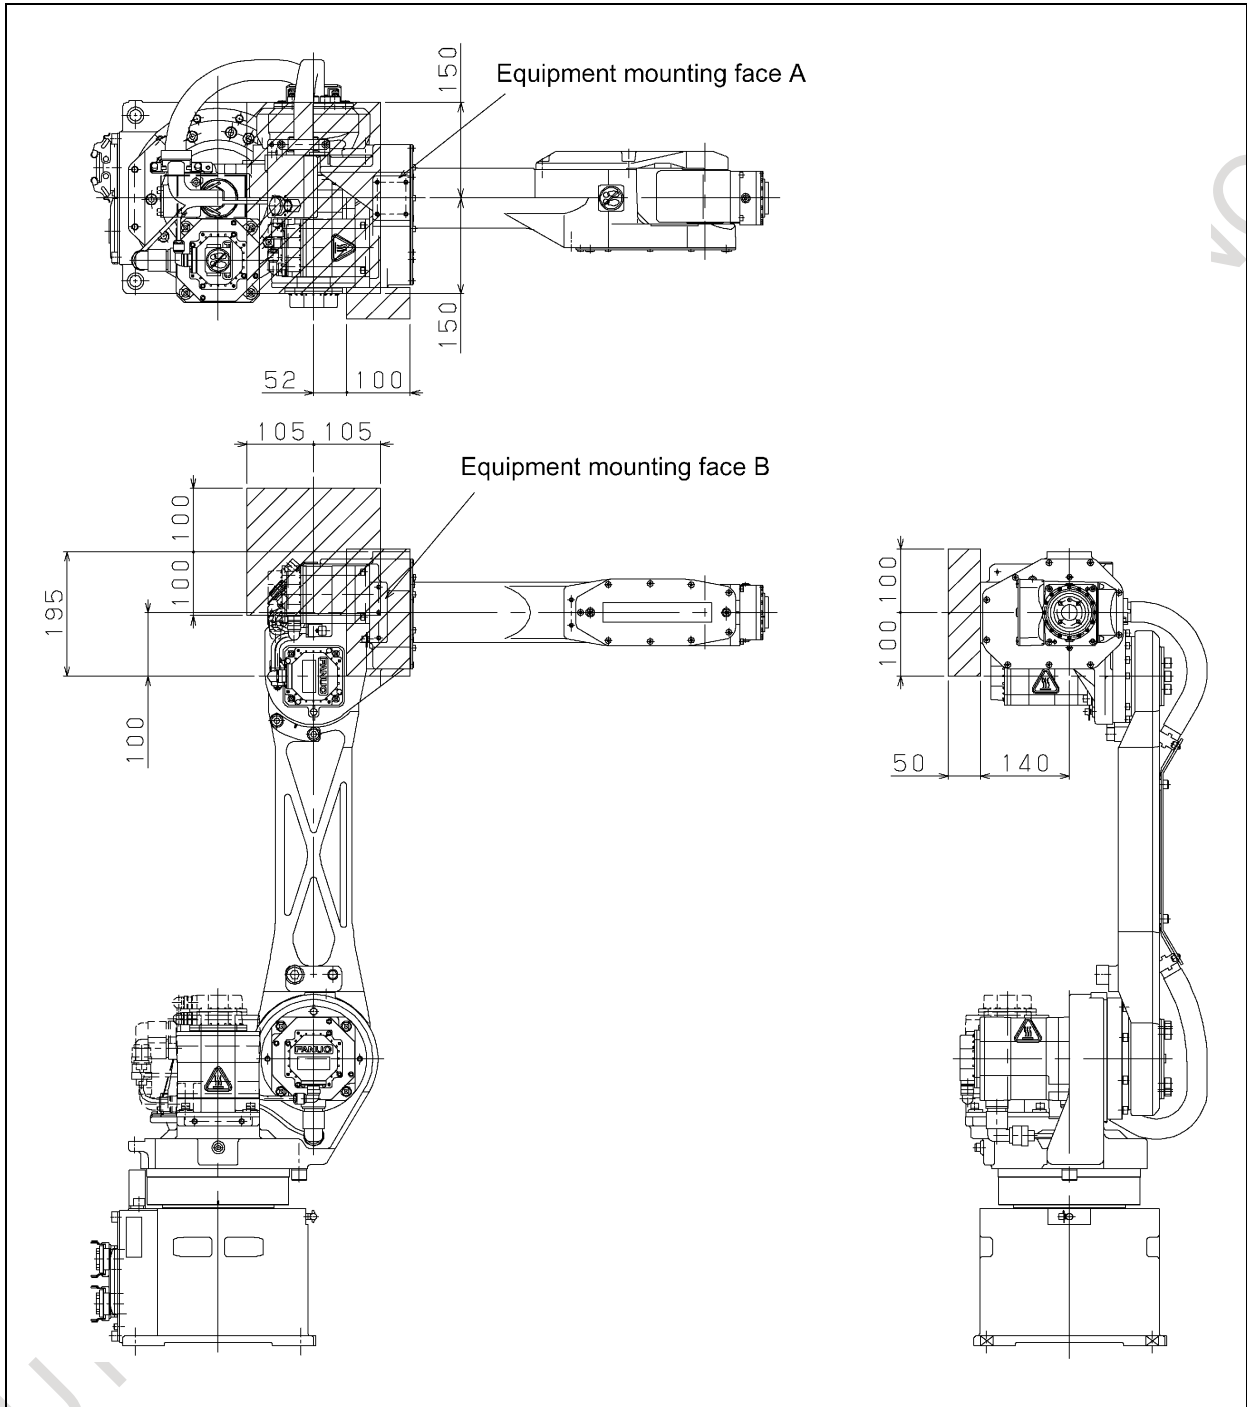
(a) Device mounting face dimensions ARC Mate 100iB, M-6iB
